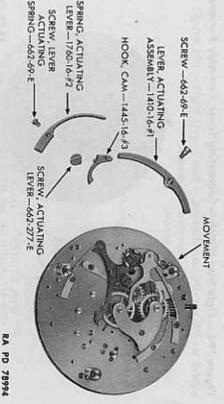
Elgin Stop Watch — Actuating Lever Assembly Removed
